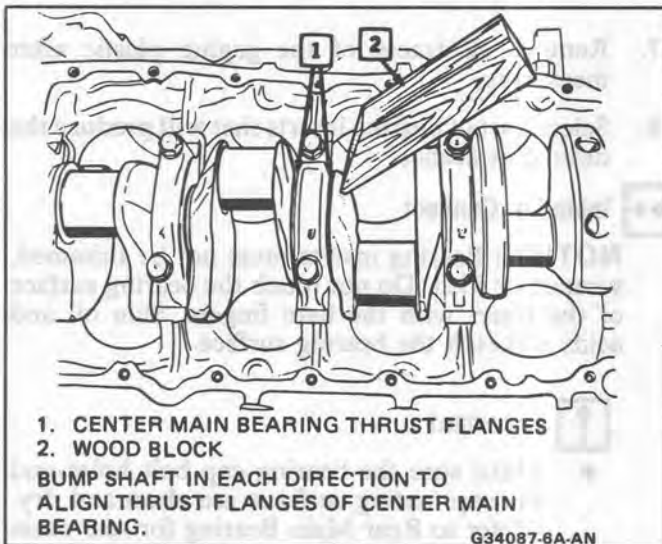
Seating the Crankshaft Thrust Bearing (Typical V Engine)
